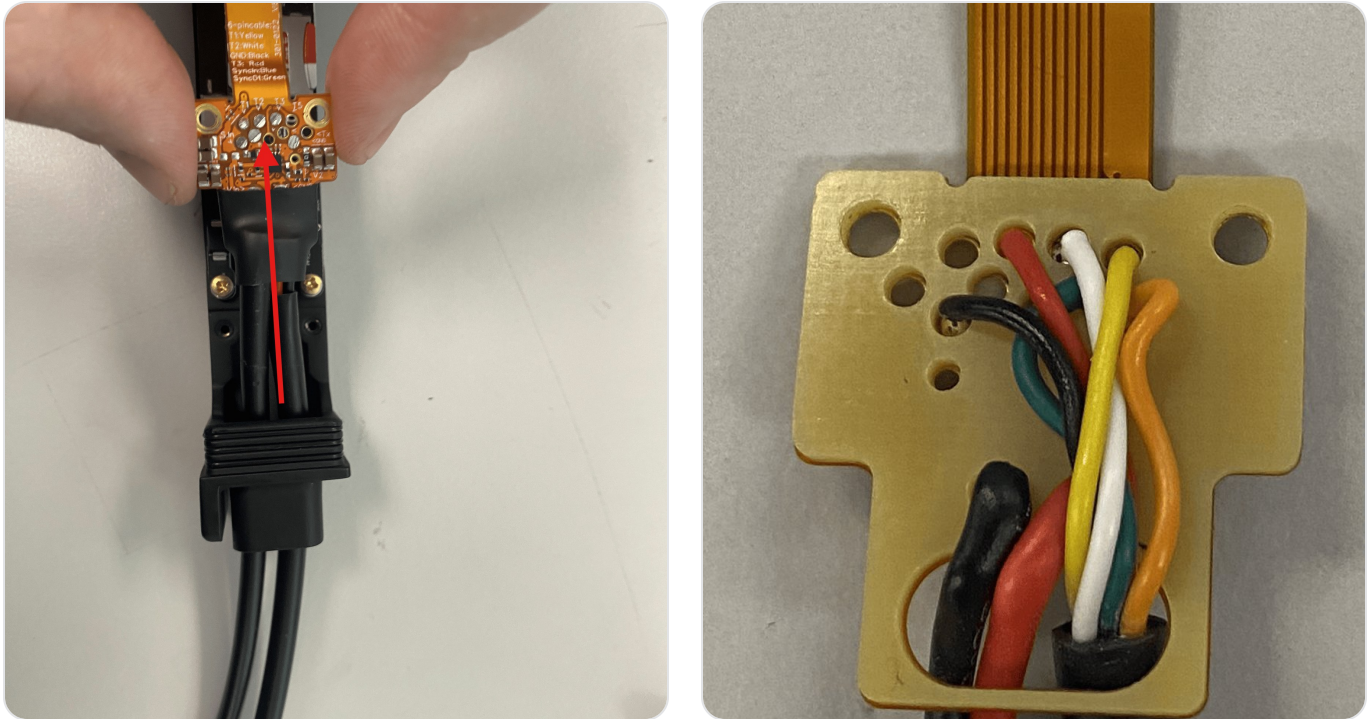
Left: removing the charge protector board. Right: the exposed input-cable wiring.
